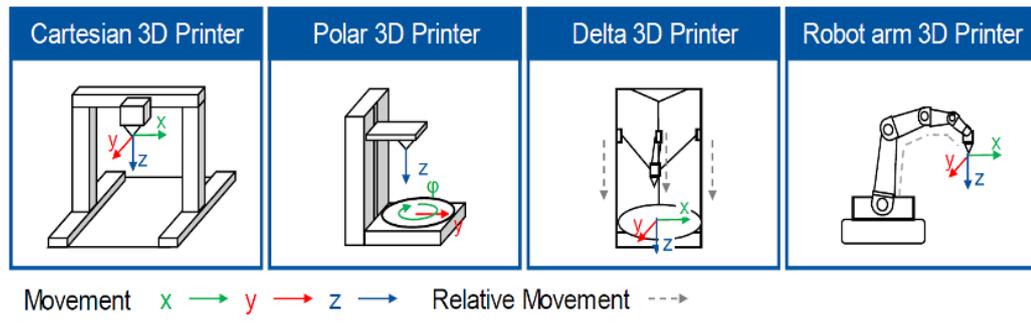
Machine platforms for FDM printers (Kampker et al., 2019).
